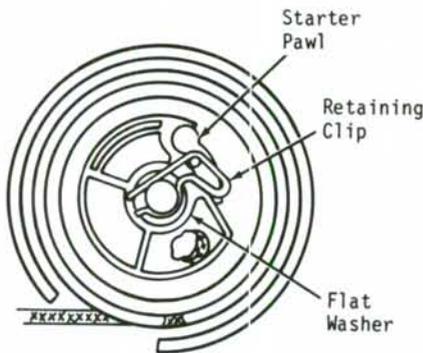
Pin on starter pawl must engage loop of retaining clip as shown.
